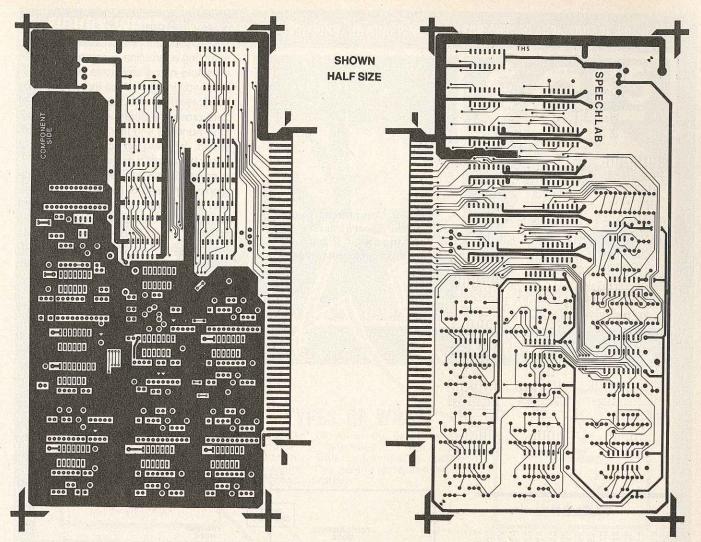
Etching and drilling guides for pc board are shown half size. Guide at left is the component side. Component layout is in Fig. 9.
